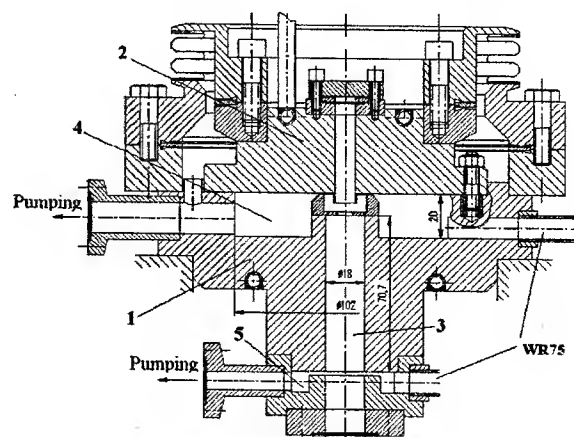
Test cavity design. 1- cavity body; 2- end cap; 3- input waveguide; 4- coaxial chamber; 5- measuring chamber
